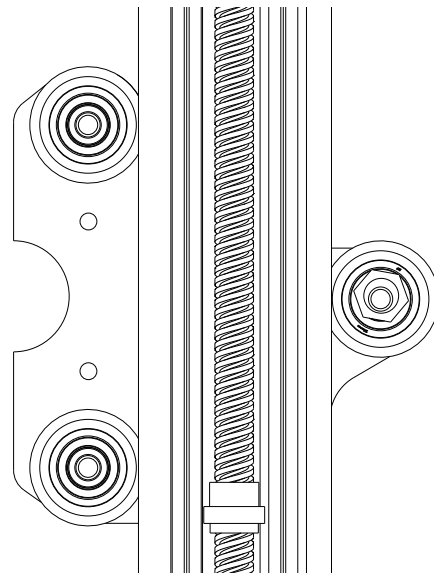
Aluminum Extrusion Roller with Three Wheels: The Third Wheel (on the right) is Adjustable via Off-Axis Nut Rotation for Optimal Friction Adjustment
